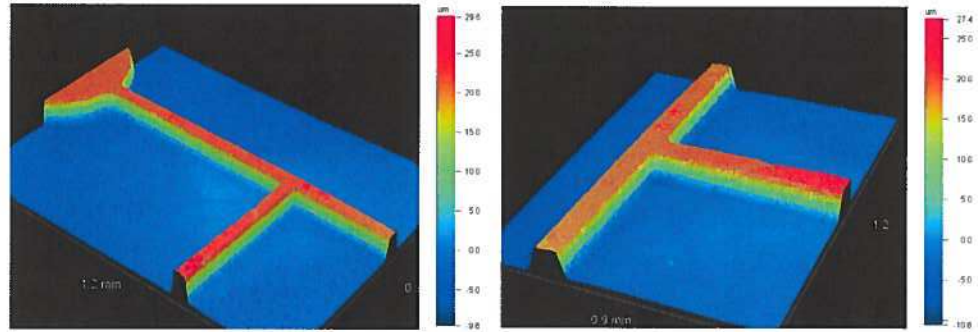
Three-dimensional measurements of the T-micromixer mold master taken by Wyko optical surface profiler.
